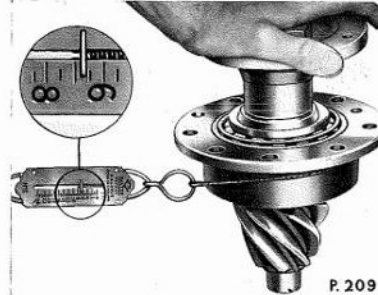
Checking the bevel pinion bearing preload, using a spring balance
